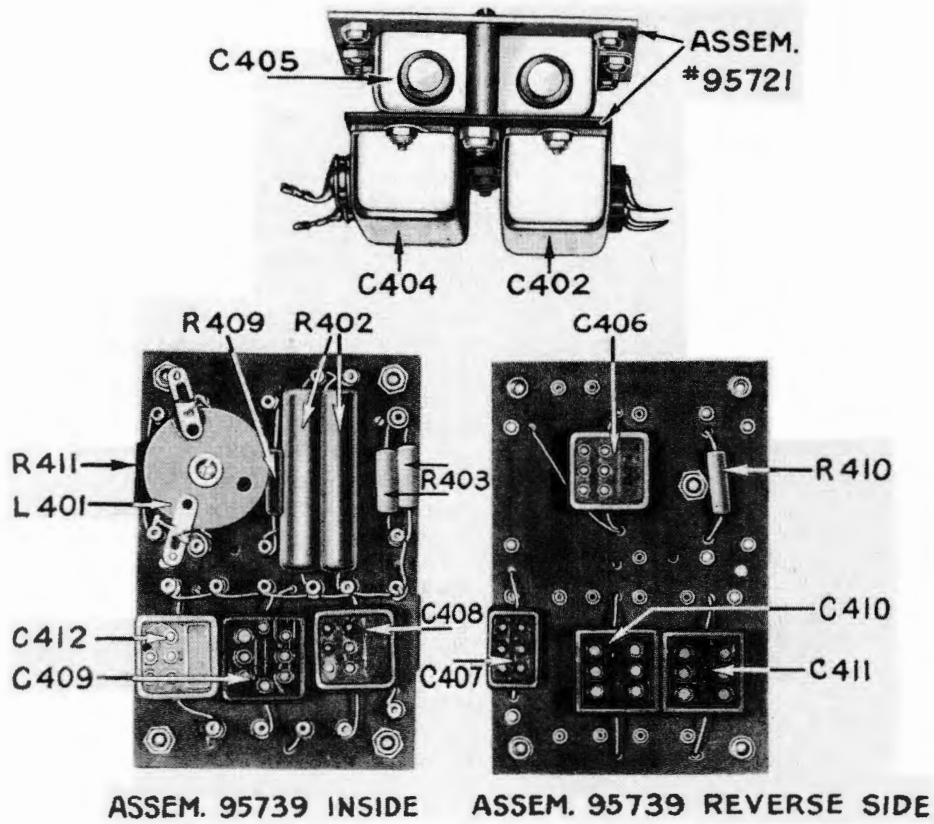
Saw-tooth Oscillator—Subassembly:
